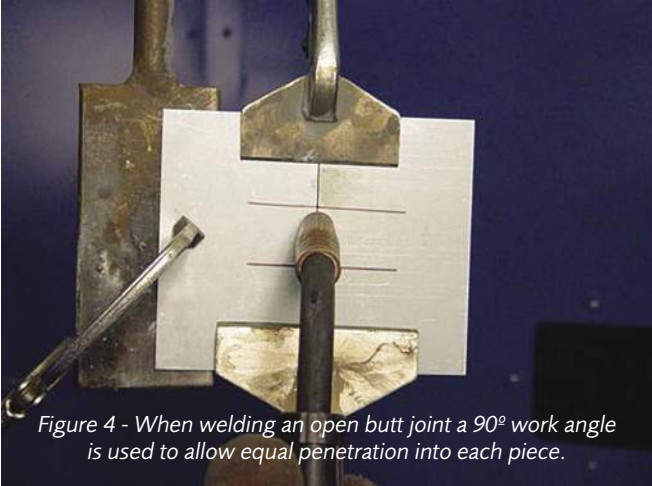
When welding an open butt joint a 90° work angle is used to allow equal penetration into each piece.
